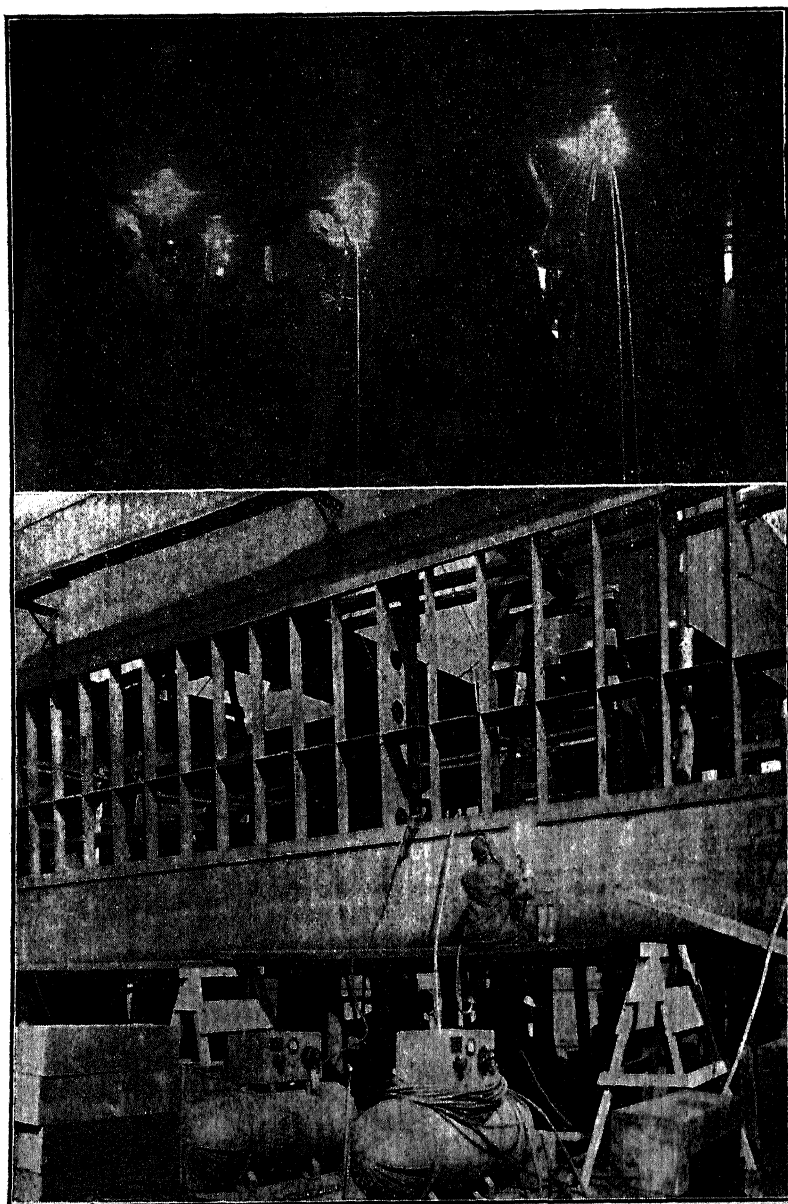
Erection views in construction of 300-ft. welded freighter. Top shows welding of the bottom hull plating. Bottom view shows welding on the side of the hull.
